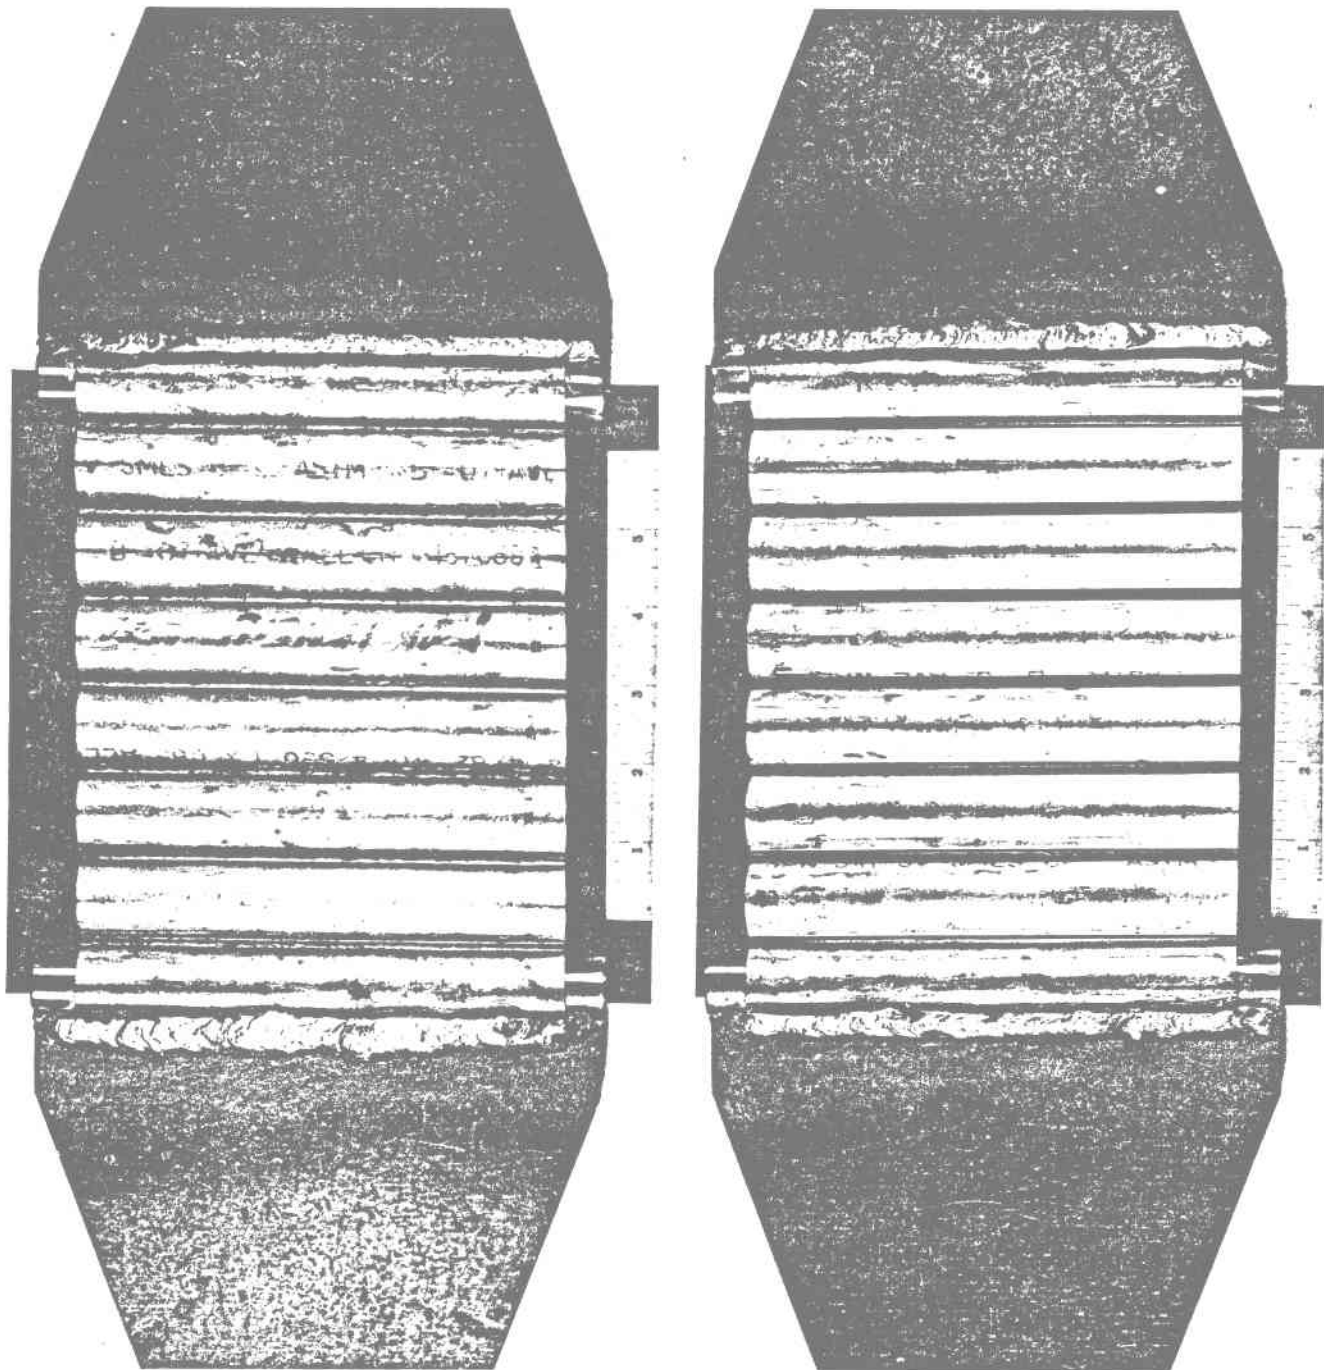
Front and Back Views of Transverse Tensile Test Specimen Before Test
